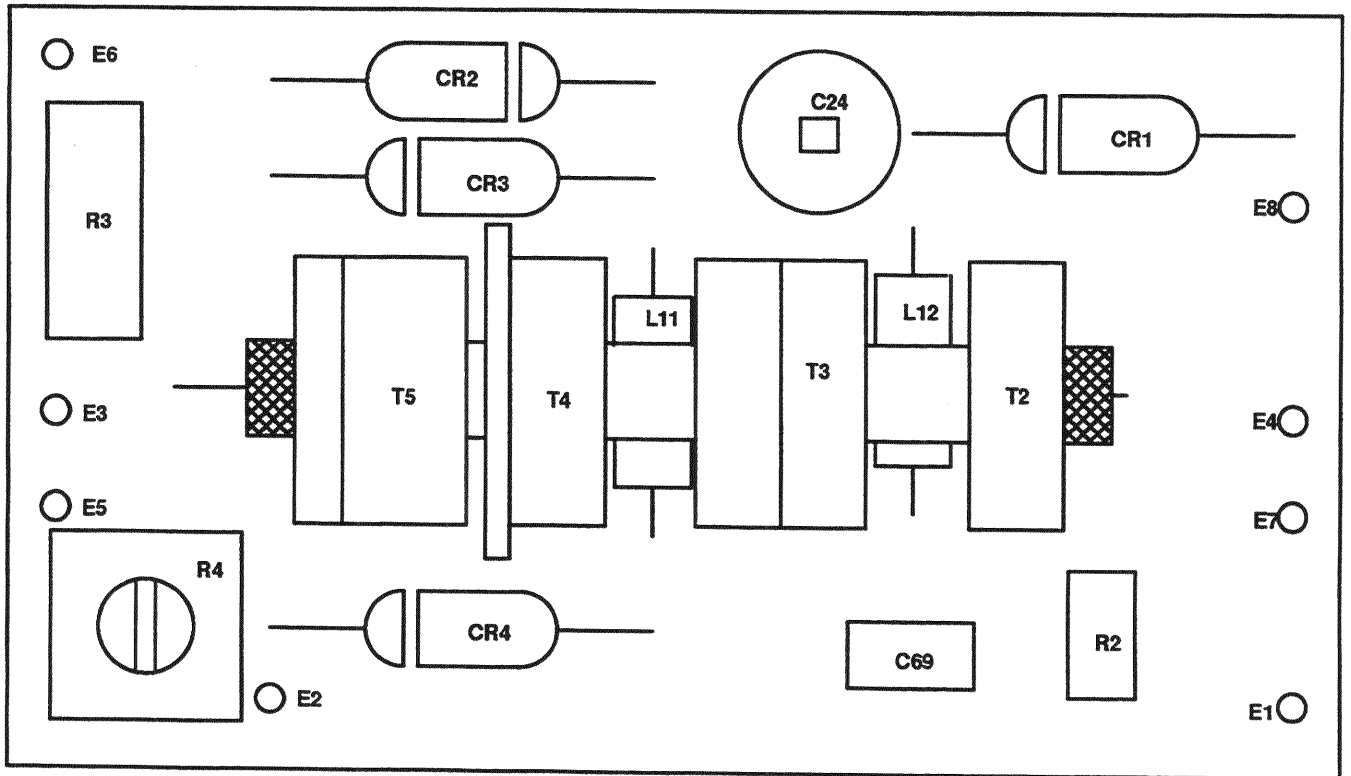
A9A1A1 Discriminator PWB Assembly Component Diagram (10303-2480 Rev. A)
